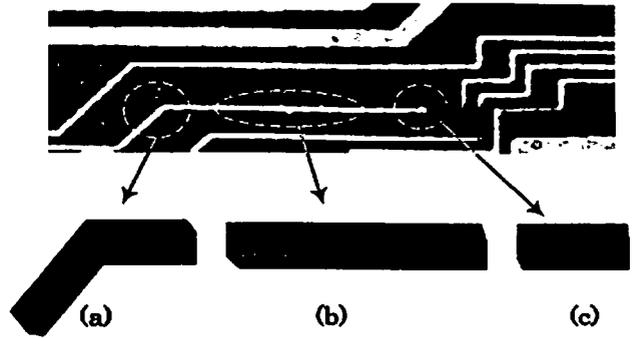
PCB pattern could be separated into many basic parts such as: (a) open elbow, (b) straight, and (c) half part.
